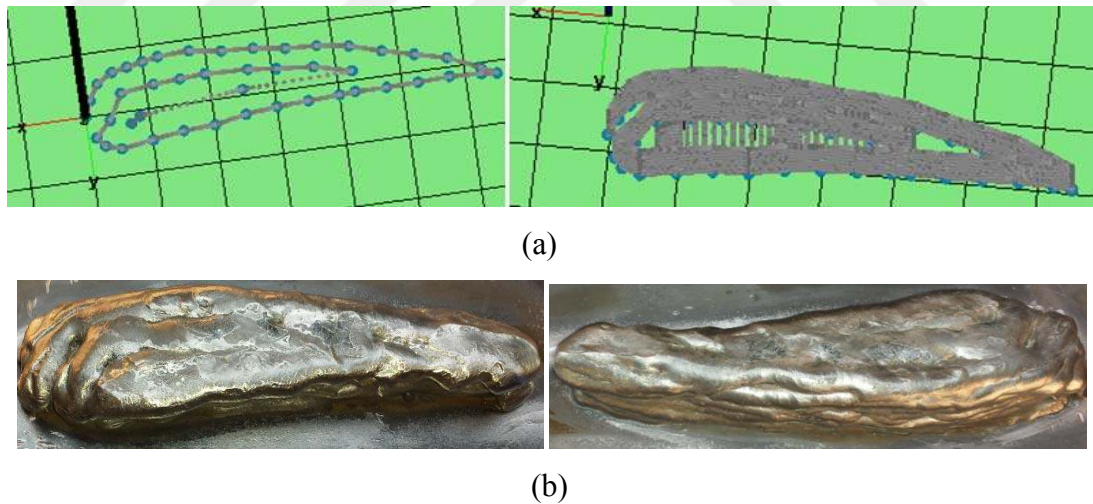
28. Combined path pattern for profile of blade part, (a) CAD drawing of the combined path pattern by spiral strategy; (b) the real deposited part using the spiral path pattern.
